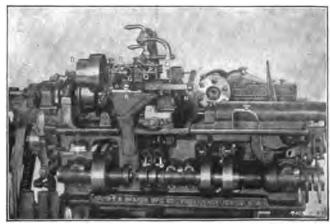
Front View of No. 00 Brown & Sharpe Automatic Screw Machine equipped with a Burring Attachment
